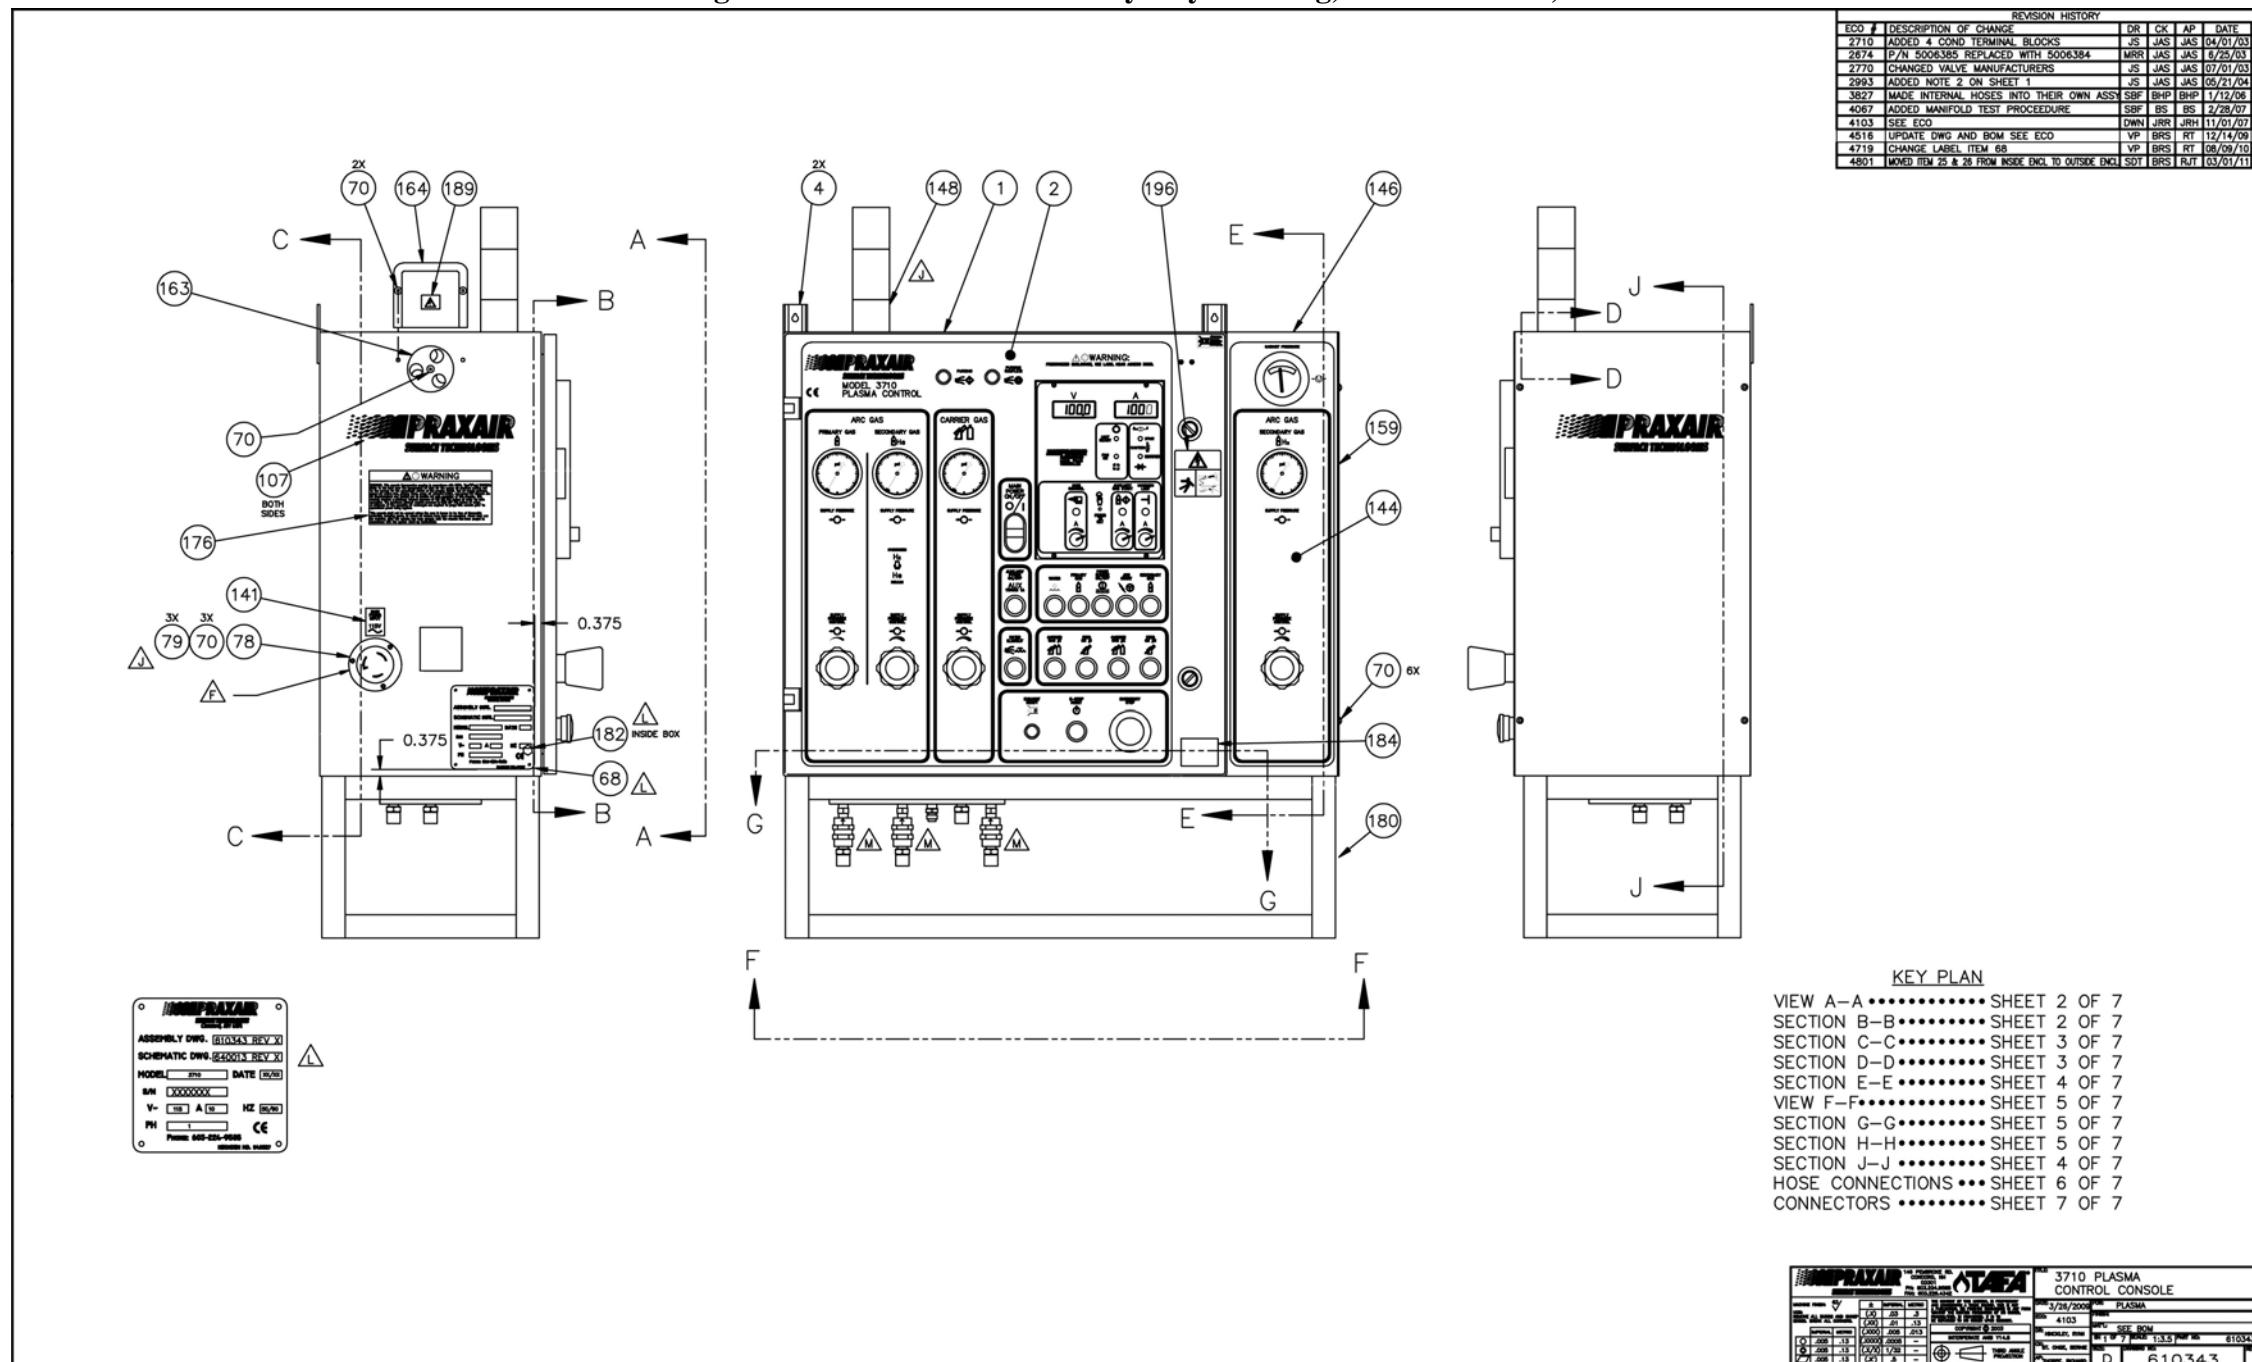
Model 3710 Console Assembly, 610343 Rev. M, S2
